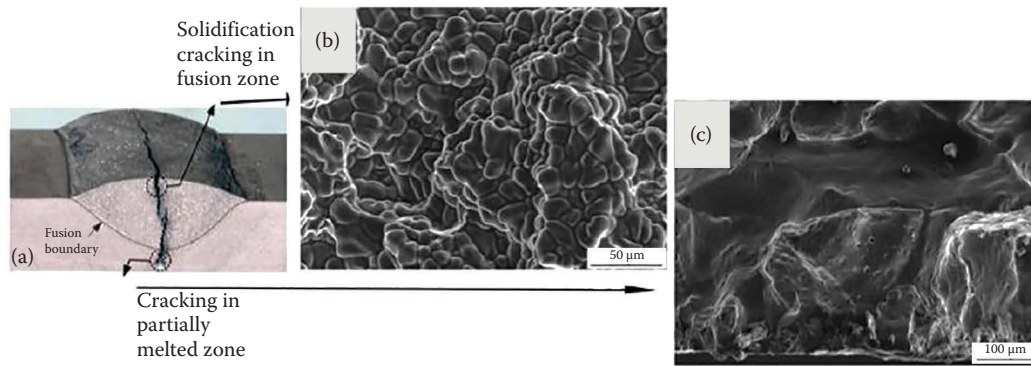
A typical hot cracking phenomenon in the weld material, partial penetration weld of Al6061: (a) cross section of weld macrograph; (b) solidification cracking, it is dendritic fracture surface; (c) liquation cracking, it shows smooth fracture surface^[8]
